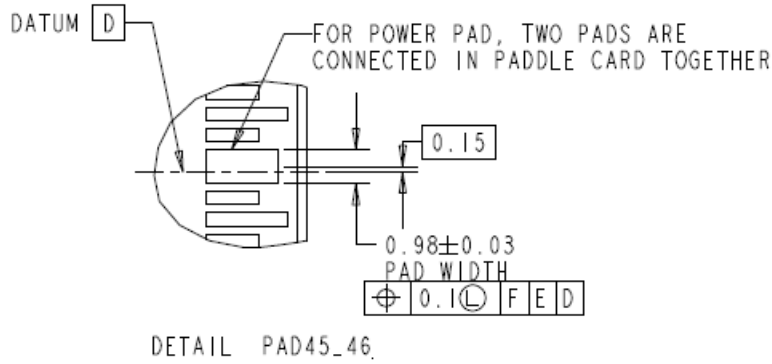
OSFP card-edge, detail of power pad (pads 45/46)
